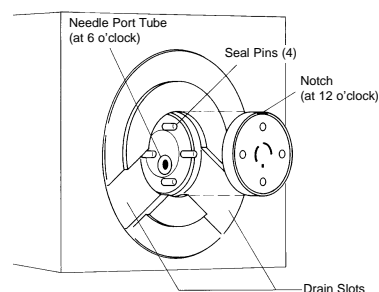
Correct orientation of the rotor seal of a front loading Model 9126.
